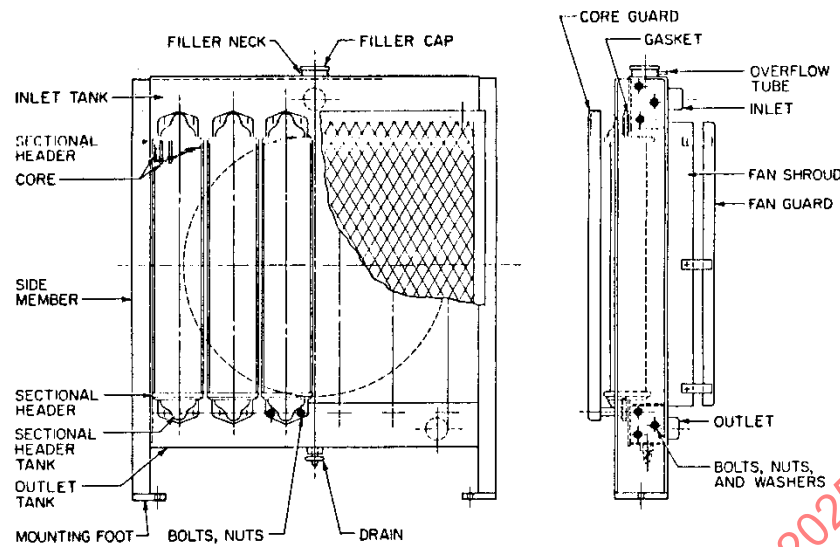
Cast- or fabricated-type (sectional core) radiator
